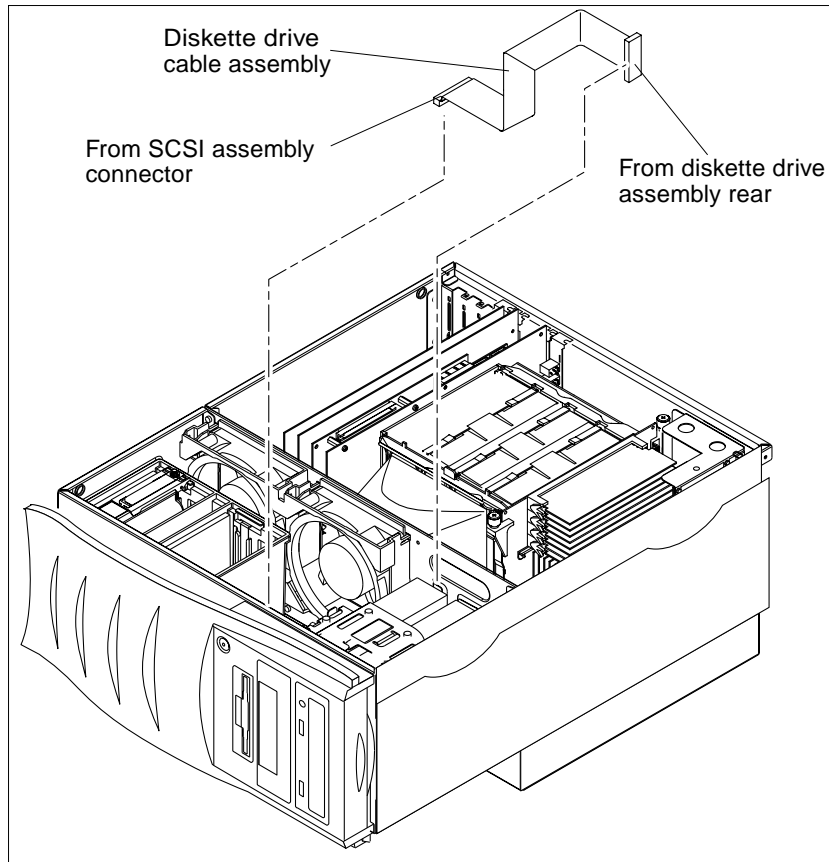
Removing and Replacing the Diskette Drive Cable Assembly
